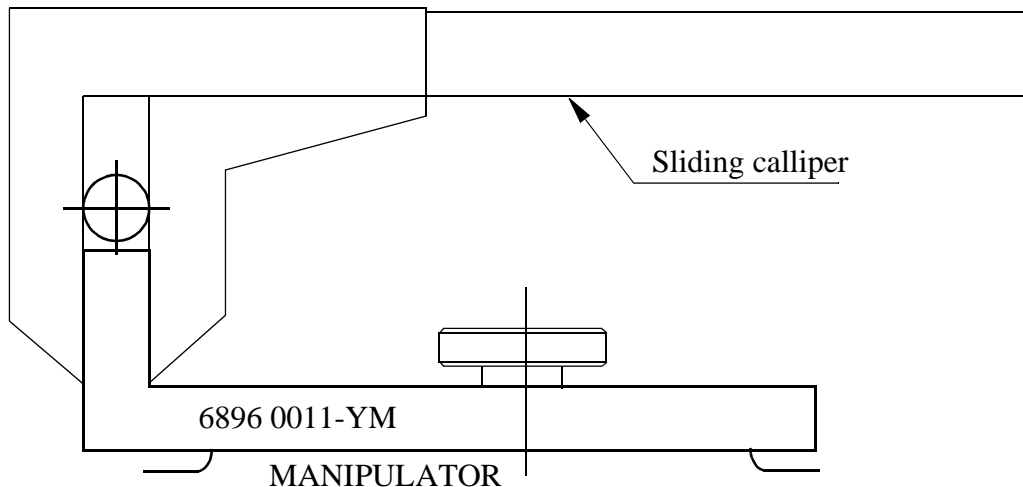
Aligning the pin and tool with a sliding calliper for axis 1.
